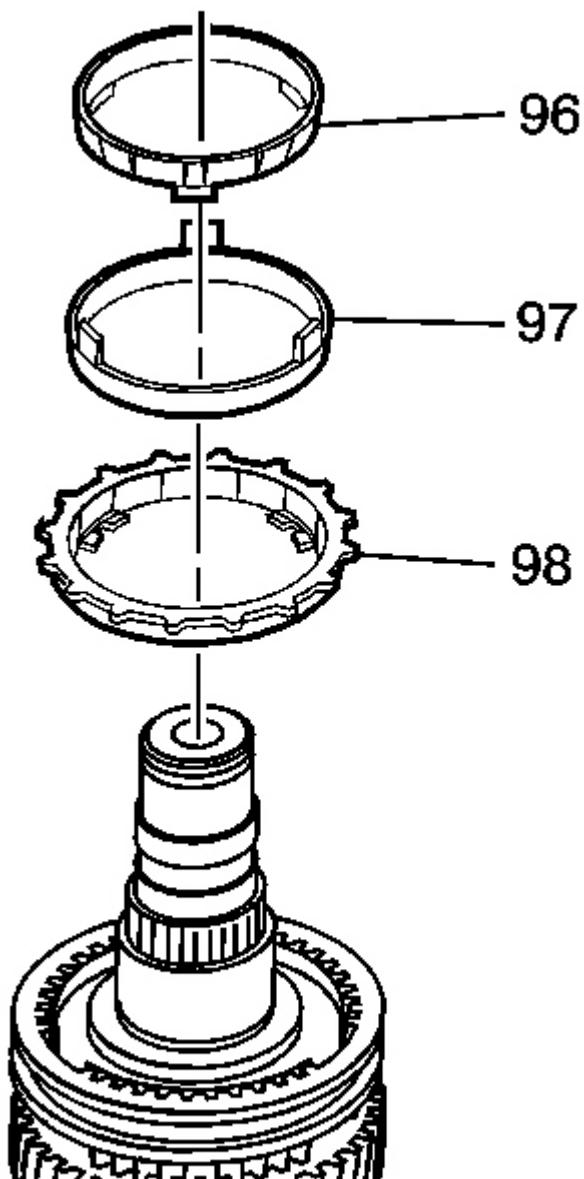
View Of 1st Gear Synchronizer Cones & 1st Gear Outer/Inner Blocking Ring
